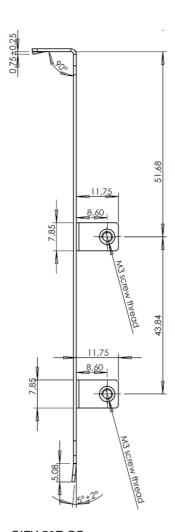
Dimensions Front Panel CIFX 50-CC or CIFX 50E-CC
